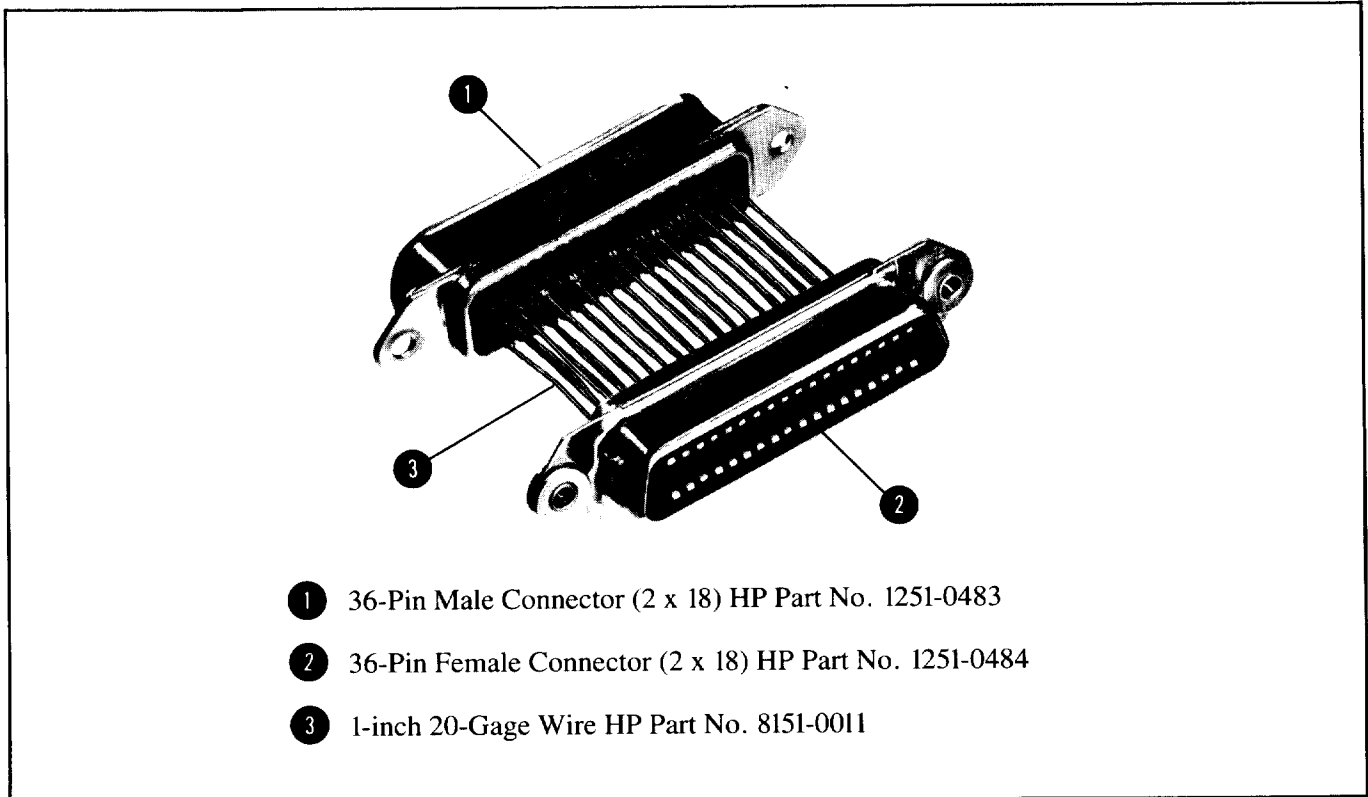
RF Section 36-Pin Extender, 08621-60056
